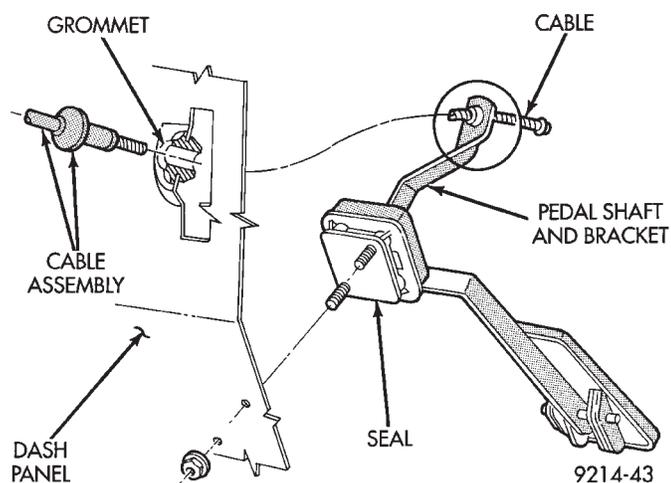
Accelerator Pedal and Throttle Cable—Front View
